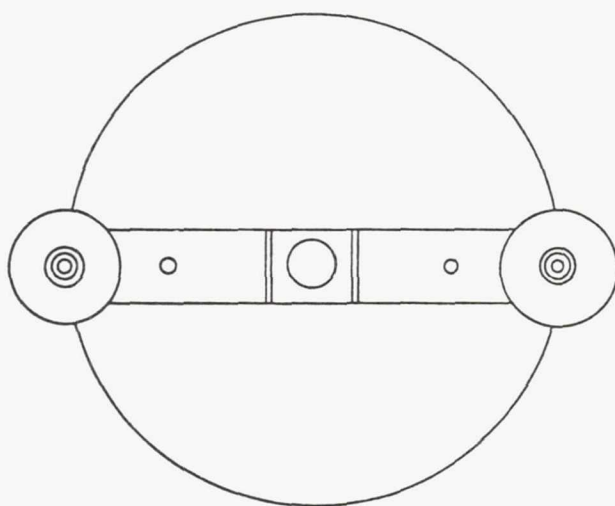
Cross-Section View of Rotating Drum with Nylon Rings
